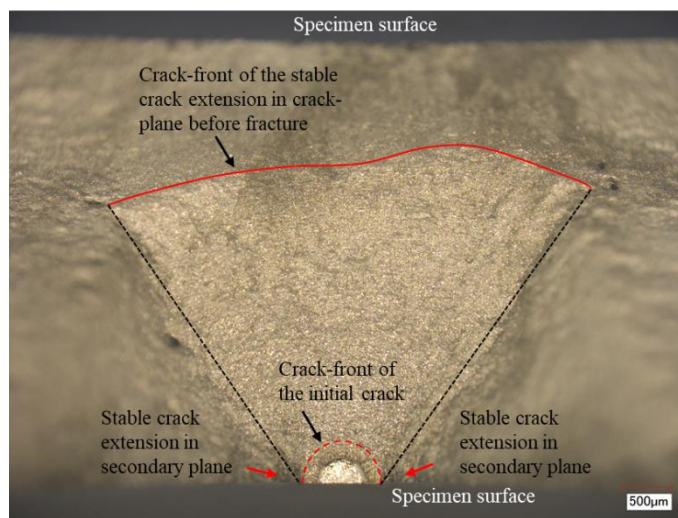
Fractographic analysis with optical microscope of the fracture surface at crack plane of the uniaxial specimen A1 (lower part).
